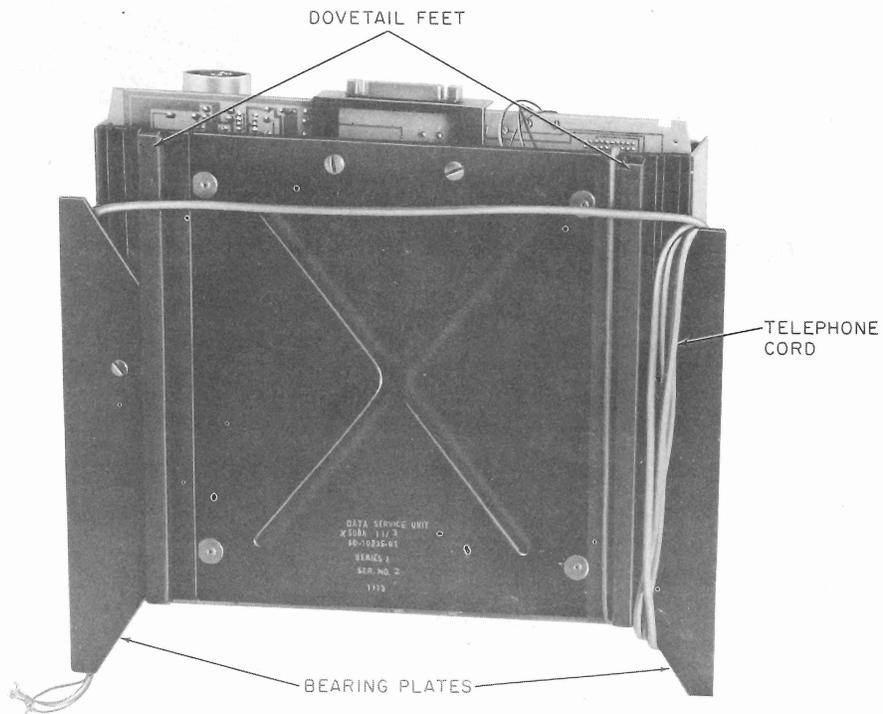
500A-Type Data Service Unit—Under View Showing Bearing Plates
